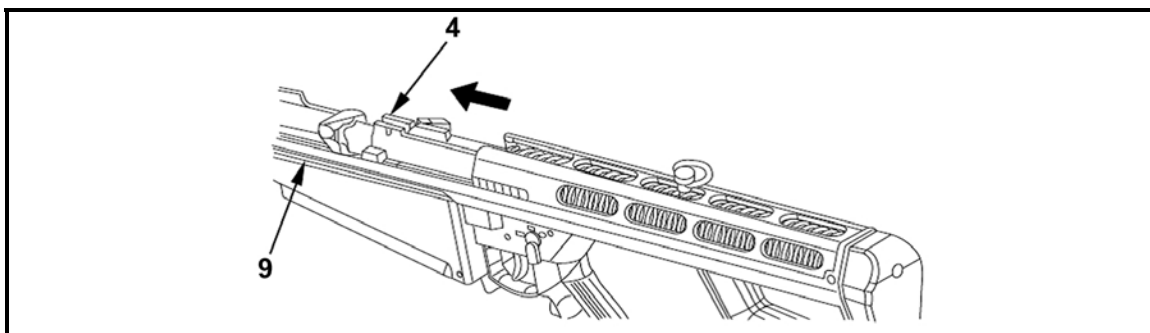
Pulling the bolt carrier forward, and lifting out of the lower receiver assembly.
